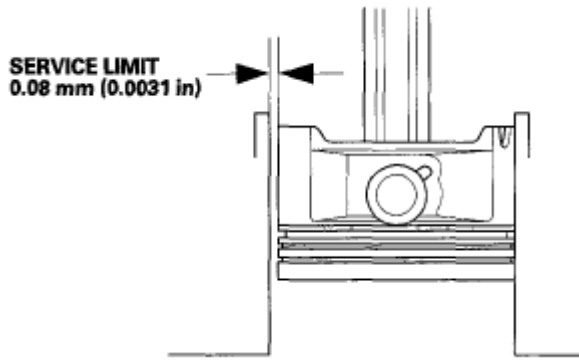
Inspecting Piston And Cylinder Bore For Excessive Wear
